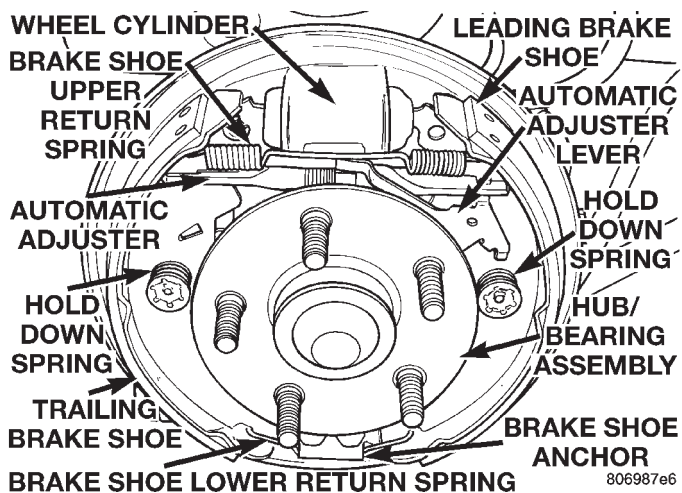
Kelsey Hayes Rear Wheel Brake Assembly
